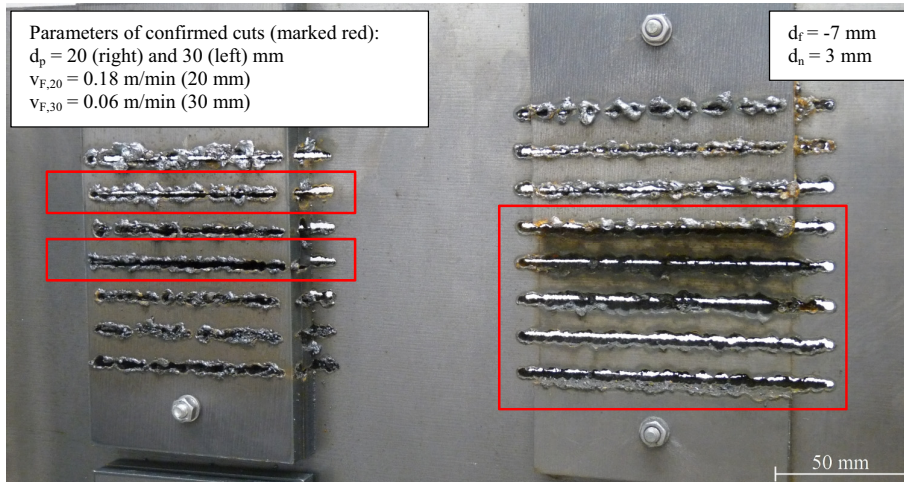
Exemplary cuts on 30 mm (left) and 20 mm (right) thick steel packages.
